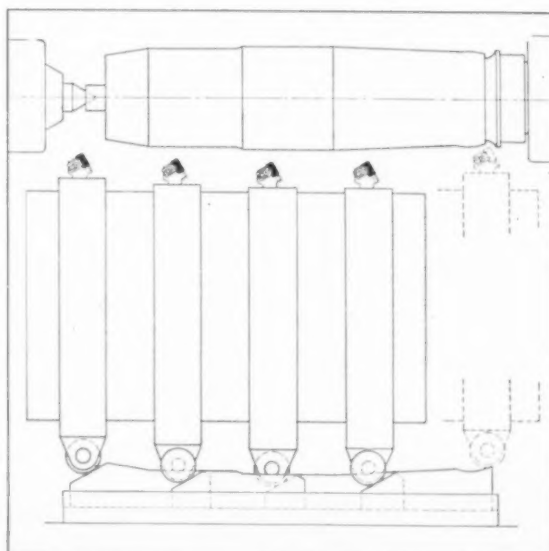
Multiple tooling setup and cam-controlled tracer equipment for rough turning a shell. The same setup is utilized for finish machining the shell, except that the cutting tools are different.
